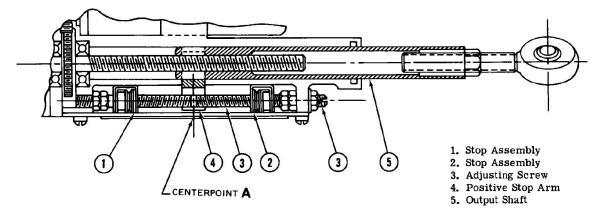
Rigging N2 Governor Actuator (Sheet 2 of 2)
